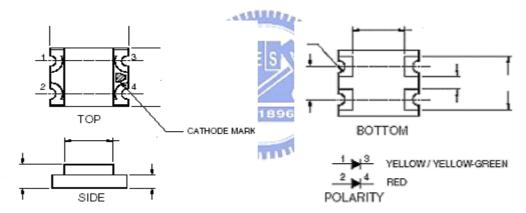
The package dimensions drawing (top and side) of an LCD backlighting application.
